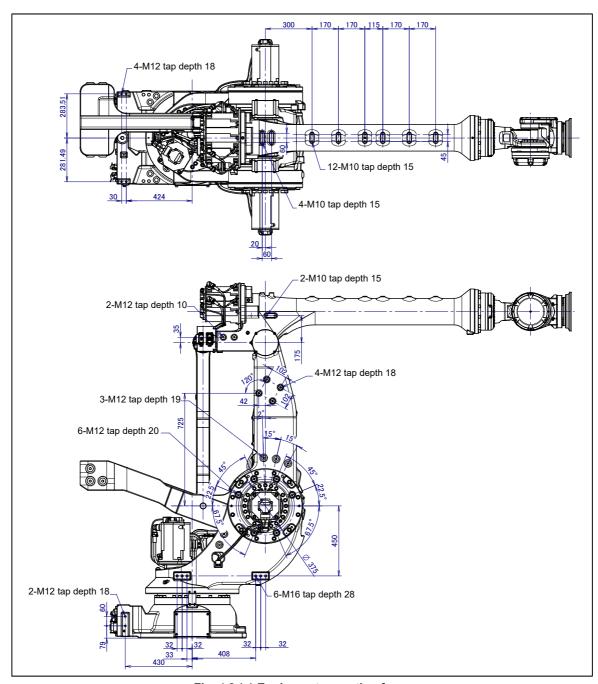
(g) Equipment mounting faces (M-900*i*B/330L (1/2))
